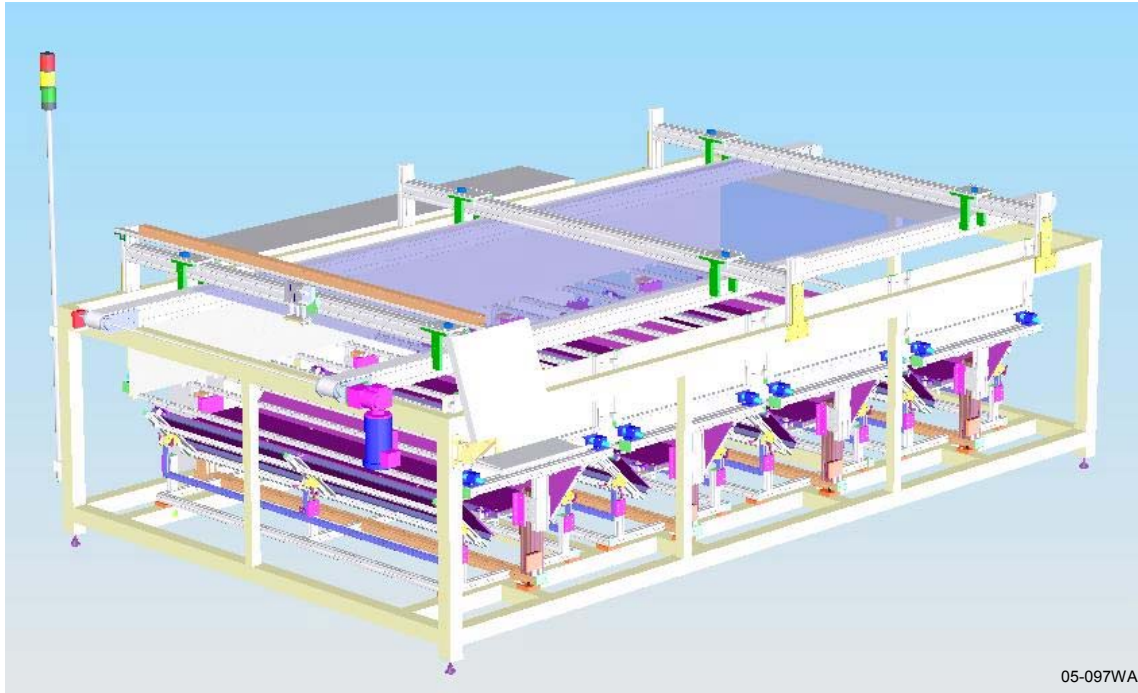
Module conveyor drive design for laminator automation (conveyor belt not shown for clarity).
